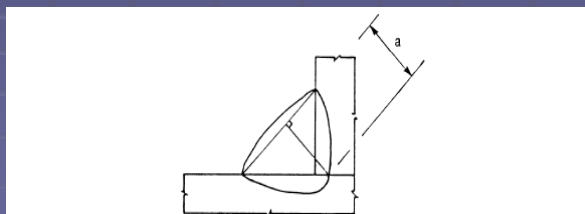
Throat thickness of a deep penetration fillet weld
